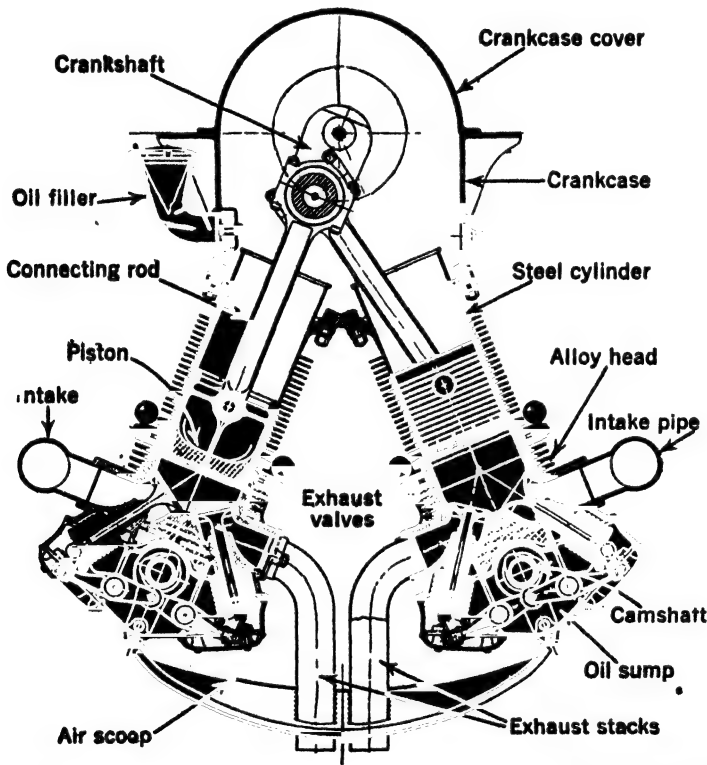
B.—Sectional View of Inverted Liberty Air-Cooled Vee Engine Showing Parts.
